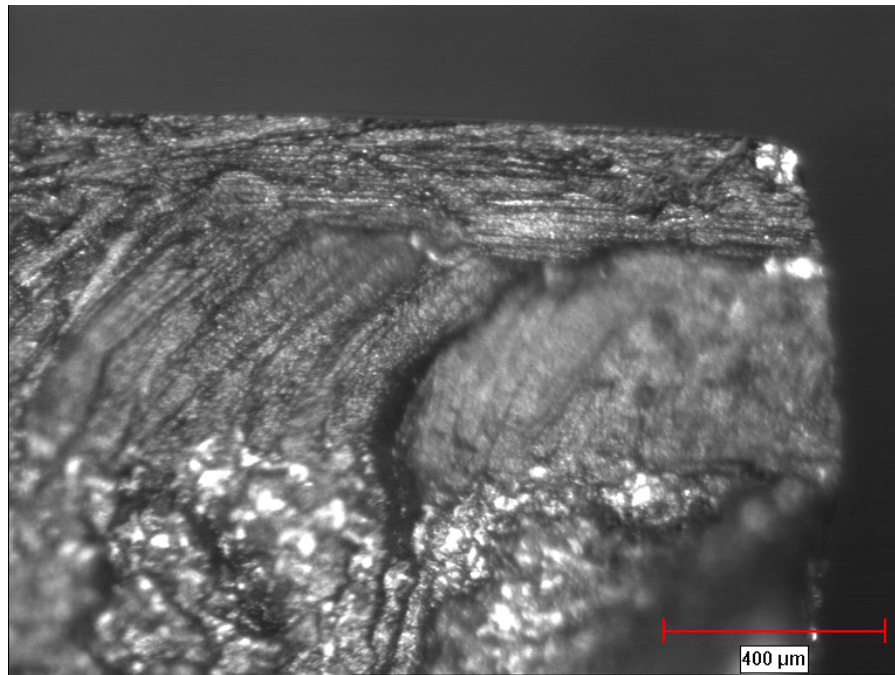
Beach marks in weld fusion zone near corner of Inconel 738 specimen
